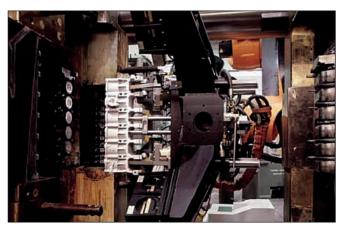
Robotic inlaying of the AlSi17Cu4 aluminum alloy insert into magnesium high pressure die casting die chamber.<sup>19</sup>
